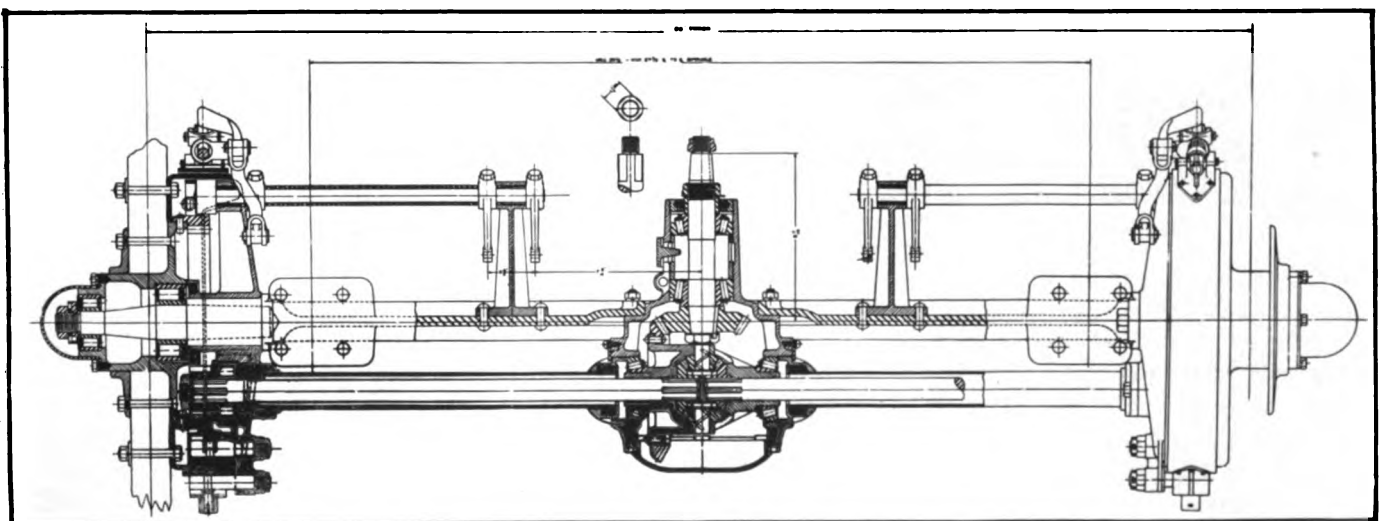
Sectional View of the Torbensen Internal Drive Rear Axle, Showing the Detail of the Construction.
